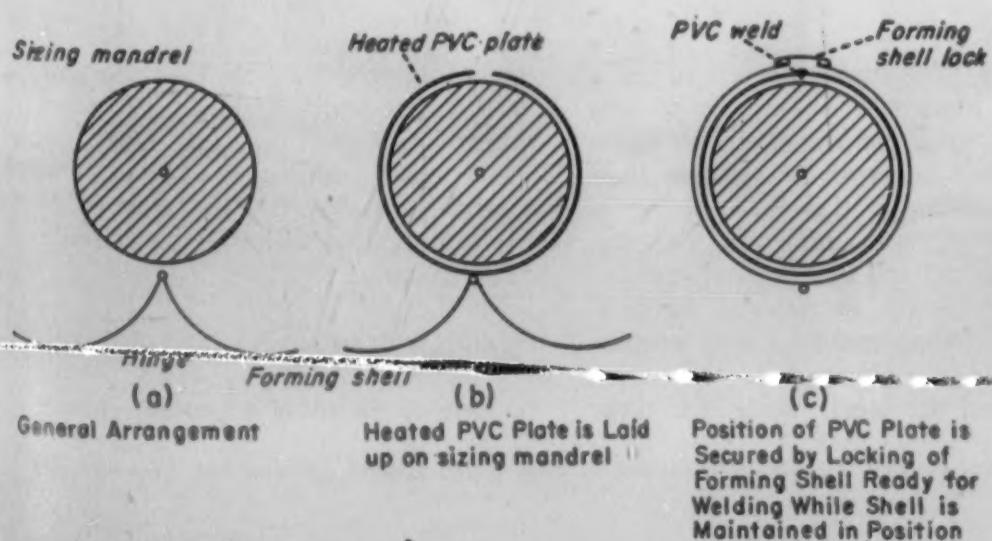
Forming of cylindrical sections from plate by use of mandrel and outer forming shell.
